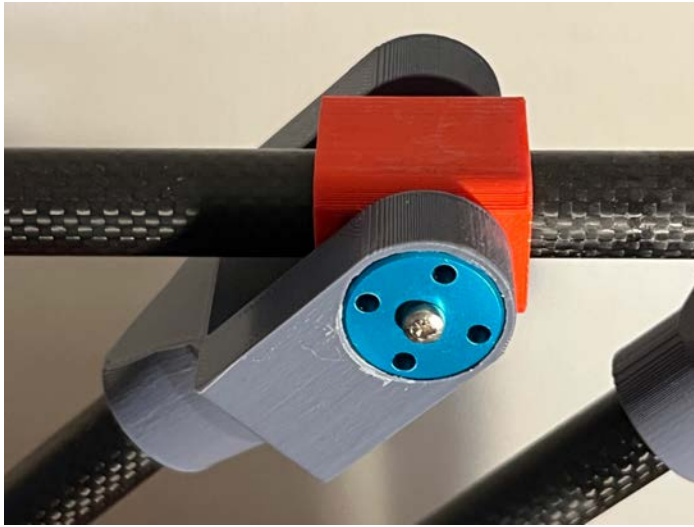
2D Arm joint mechanism. Fundamental to the arm mechanism design, the arm joints utilize small ball bearings to ensure high precision and low friction operation.
